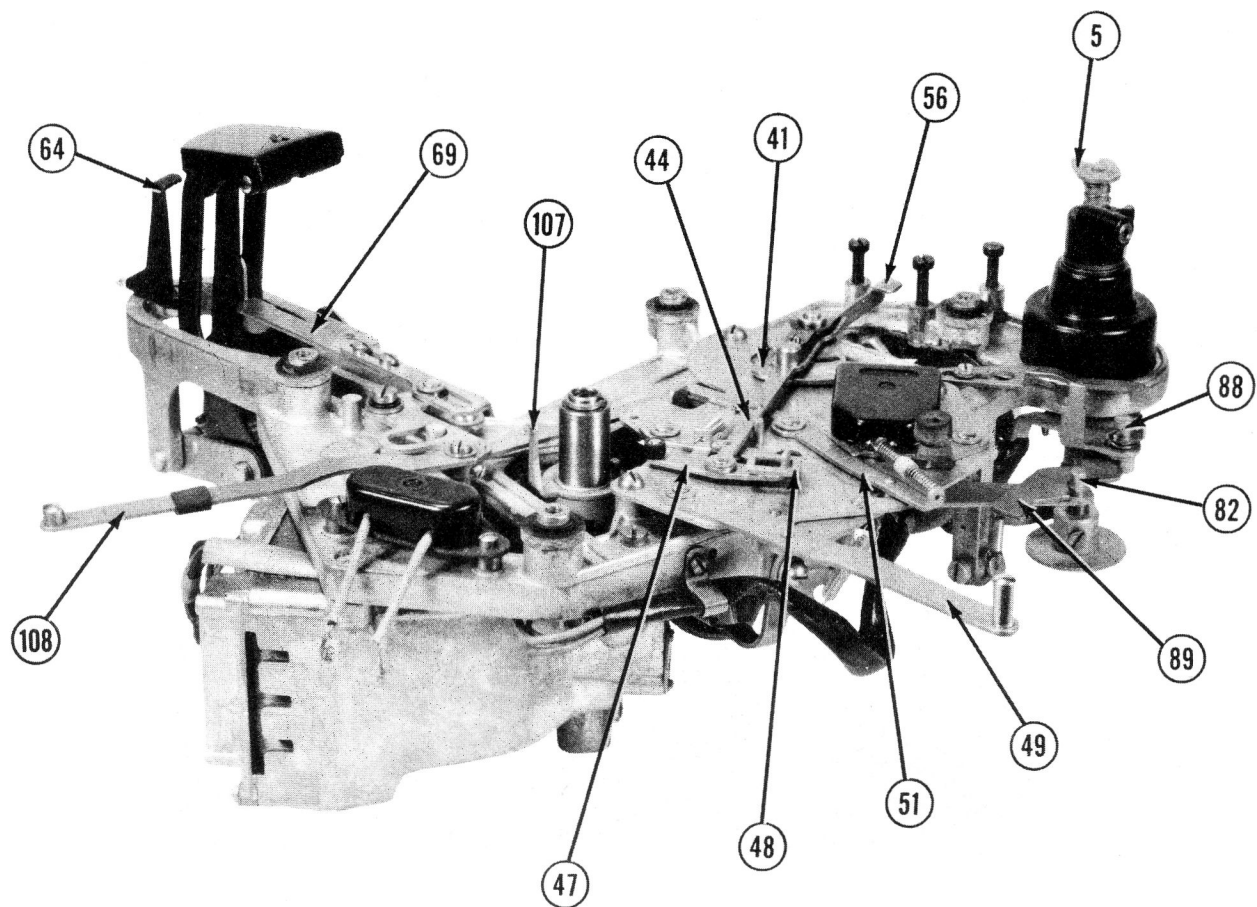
FRONT VIEW—UNDER CHASSIS ASSEMBLY
